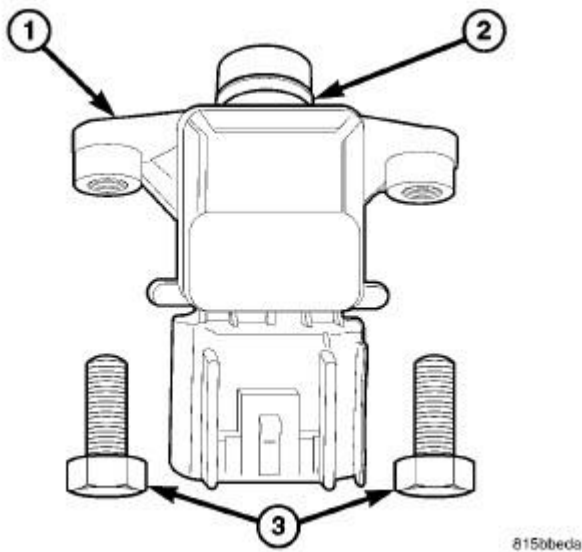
MAP Sensor Mounting Bolts And O-Ring
